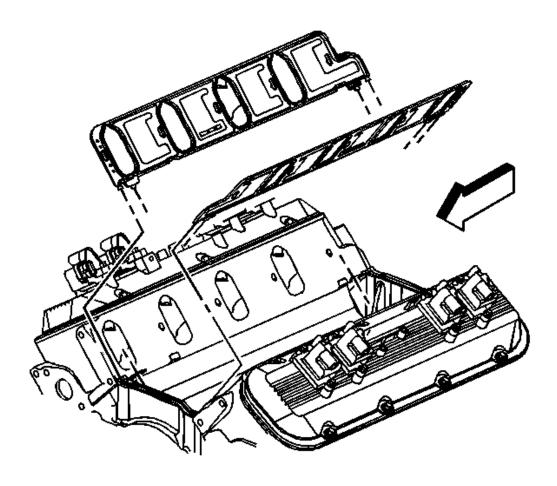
View Of Intake Manifold End Seals Courtesy of GENERAL MOTORS CORP.
